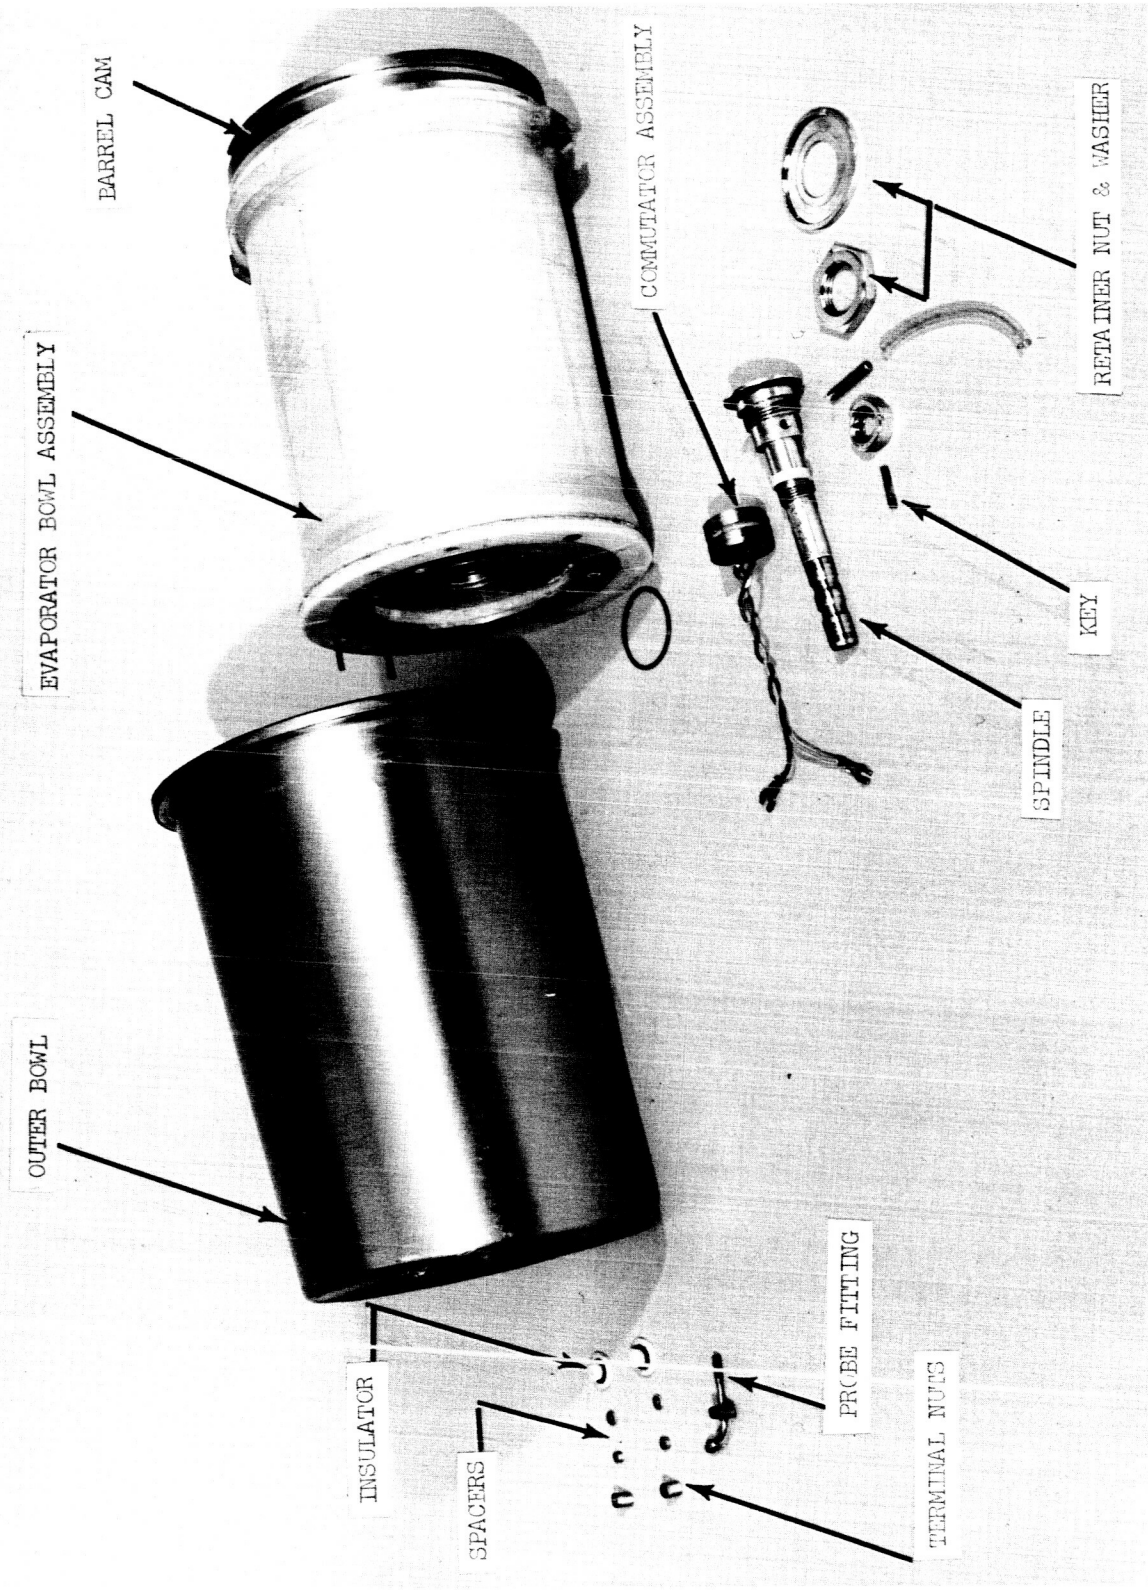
DISASSEMBLY OF EVAPORATOR BOWL AND OUTER BOWL
